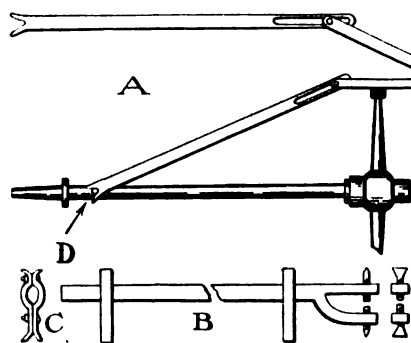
TESTING BAR AND SETTING GAUGE USED IN AXLE SETTING.
